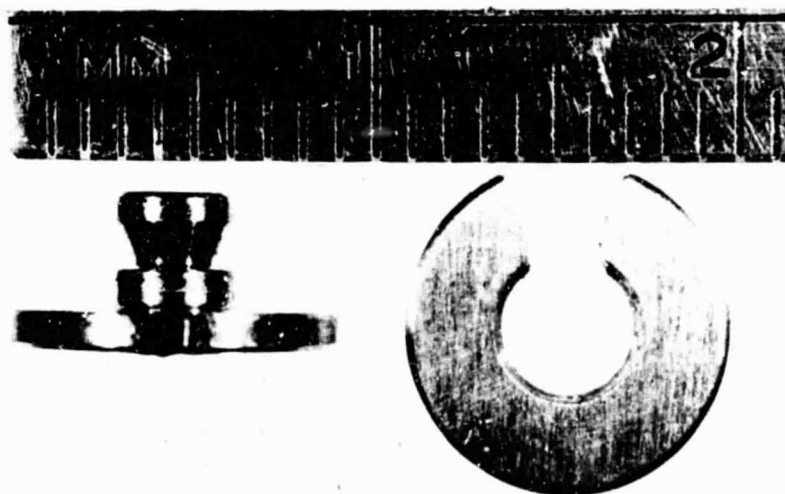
Weld Type Fastener with Split Ring Retainer
